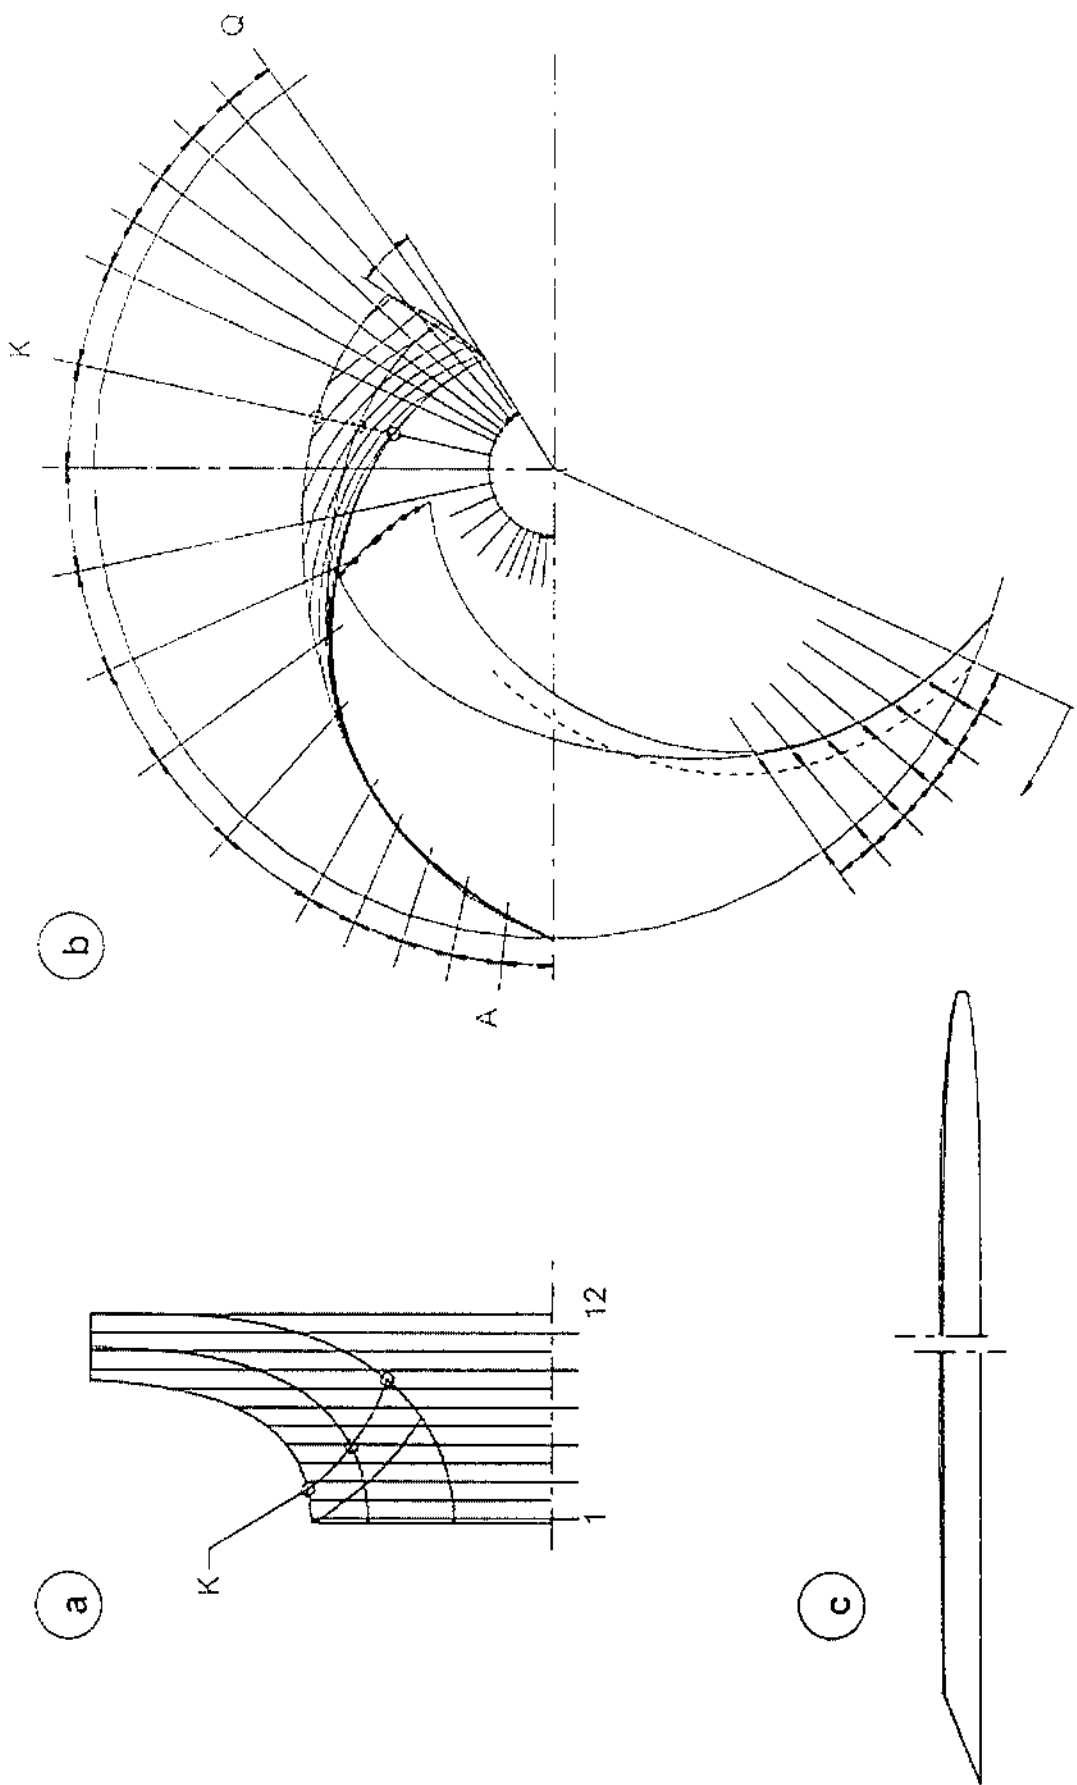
Representation of the impeller coordinates by board lines 0 to 12 and radial sections A to Q.
